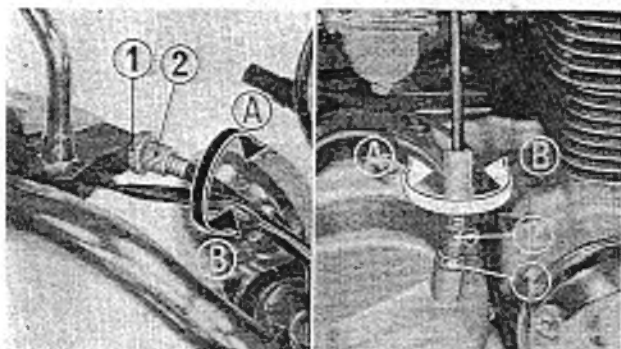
① Lock nut ② Clutch cable adjuster
